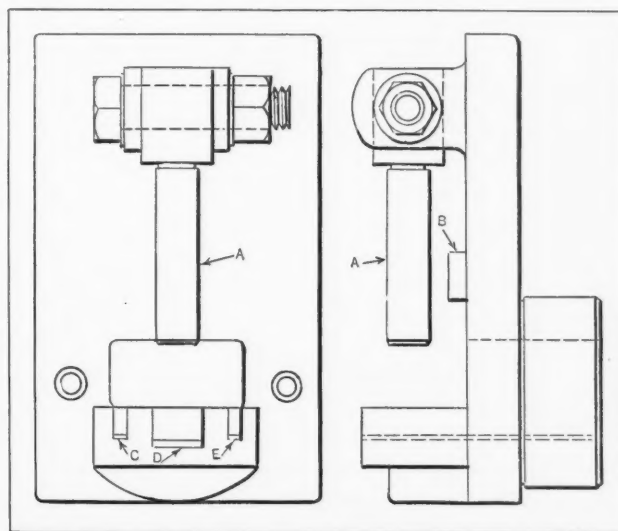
Fixture for Holding Part Shown in Fig. 1 While Broaching the Finished Surfaces
